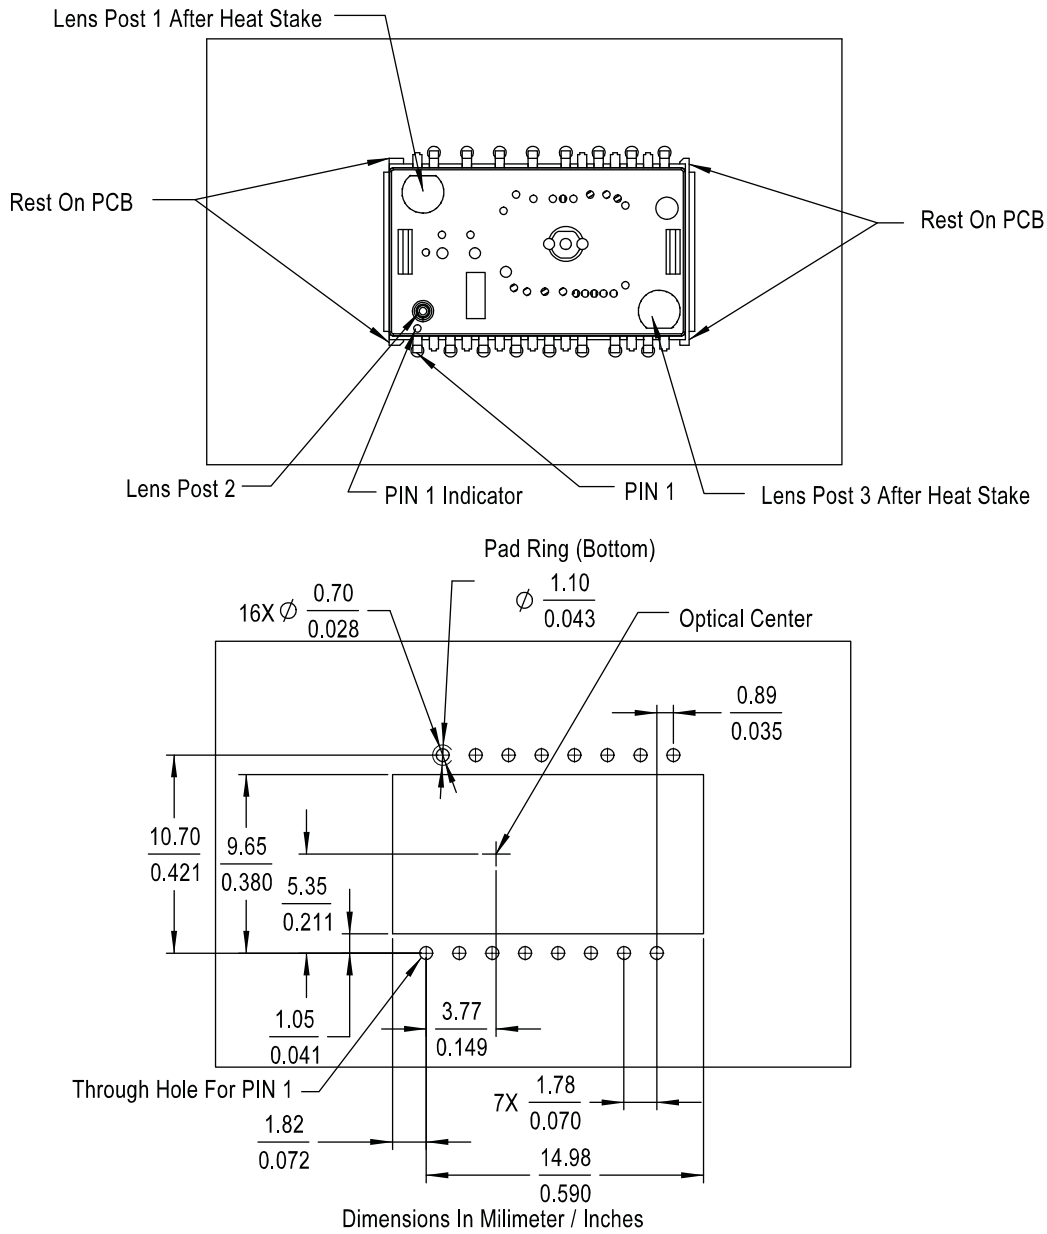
Recommended PCB Mechanical Cutouts and Spacing
